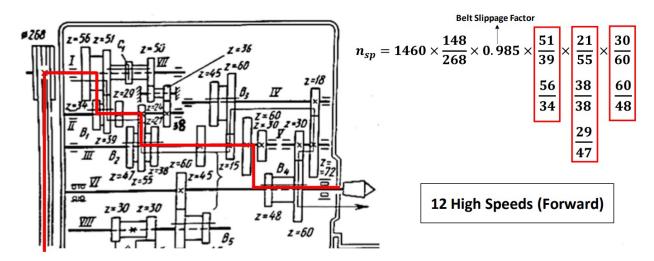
Forward Rotation (without back gear) $\rightarrow C_1$ Disengaged
